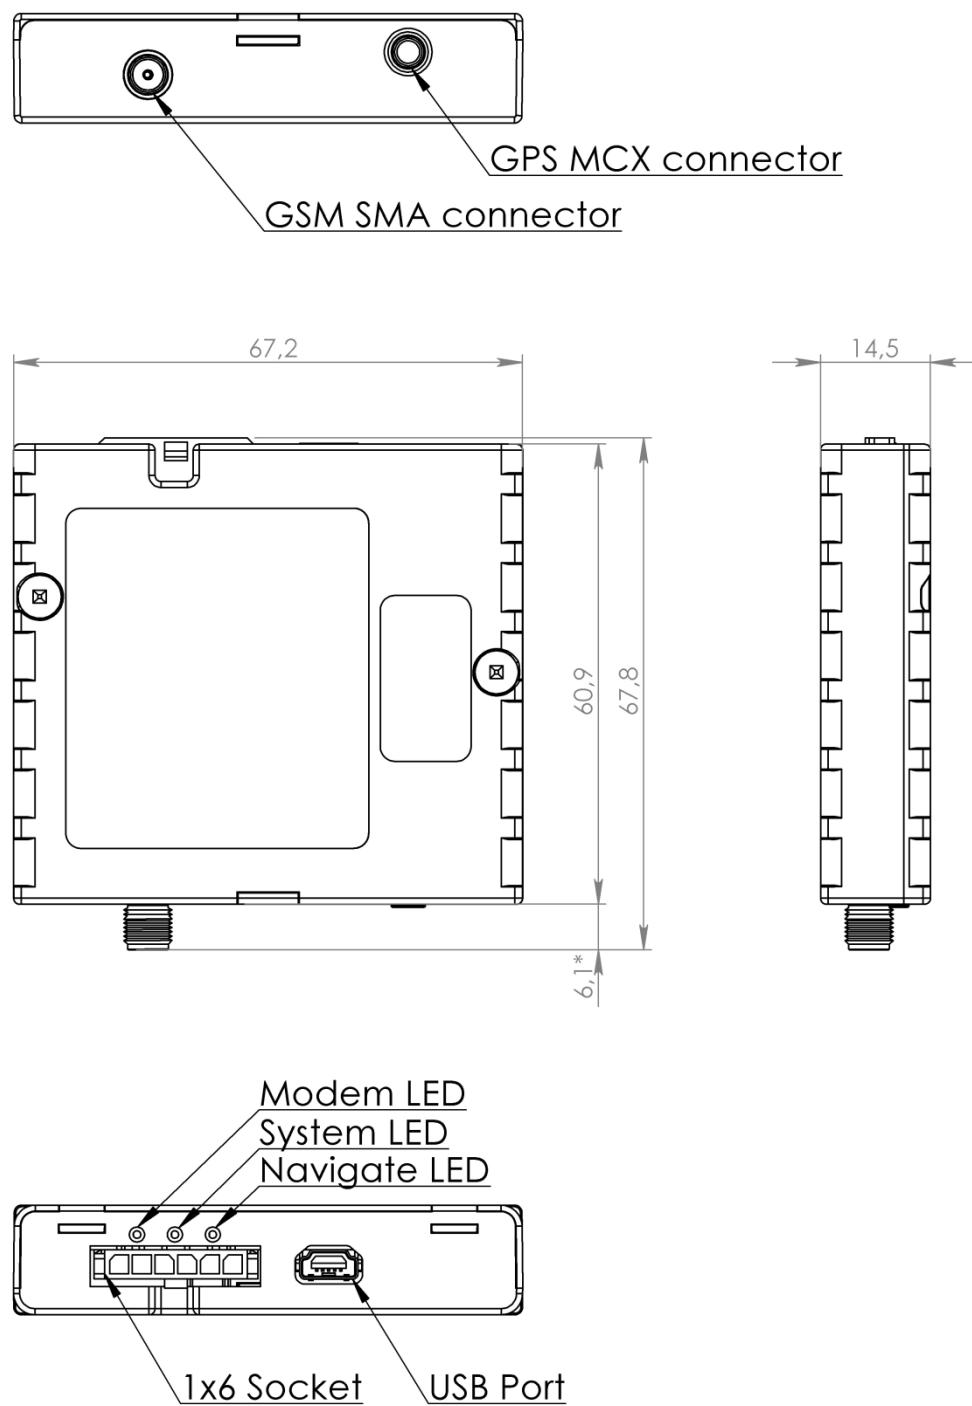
300ET View & Dimensions (Tolerance ±2mm)
